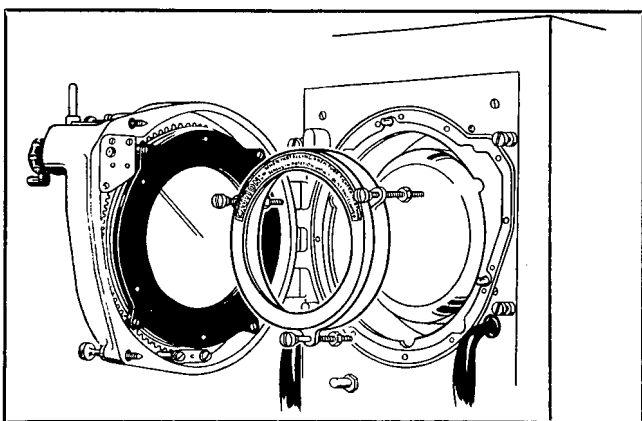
Geared Cursor in Position to Permit Removal of Cathode Ray Tube
